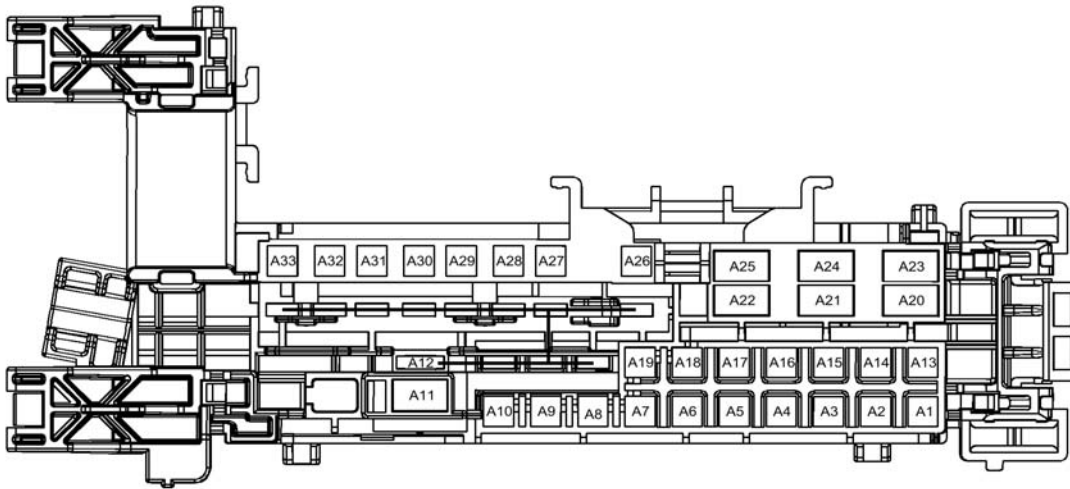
X53A Fuse Block - Rear Body Top ViewCourtesy of GENERAL MOTORS COMPANYX53A FUSE BLOCK - REAR BODY FUSE IDENTIFICATION
